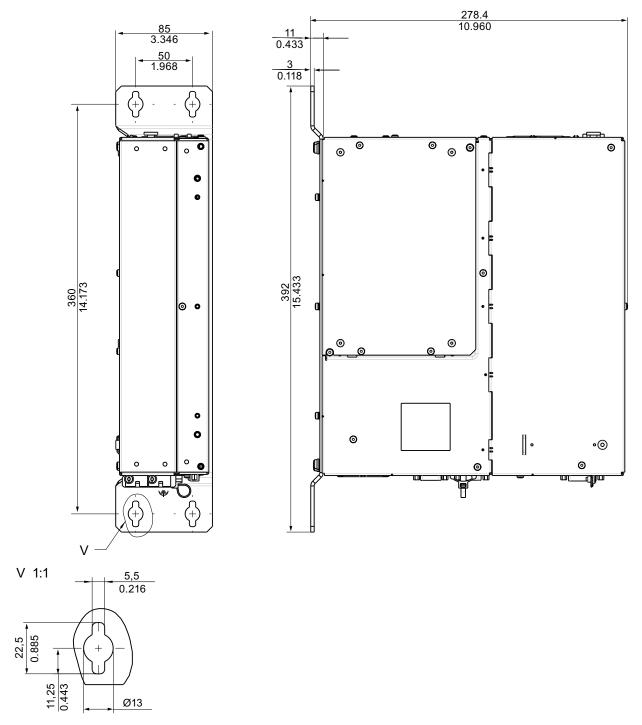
Dimensional drawings for vertical mounting (model without DVD burner and without WinAC backup battery)
